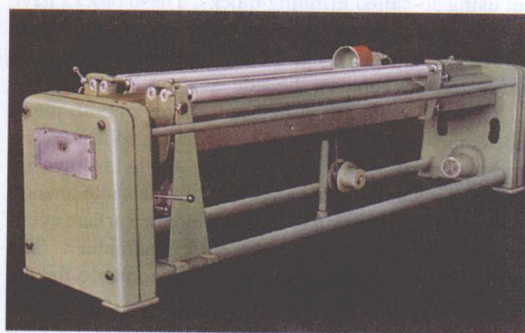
A card grinding machine AH 5 (grinding stand) by Franz Müller.
